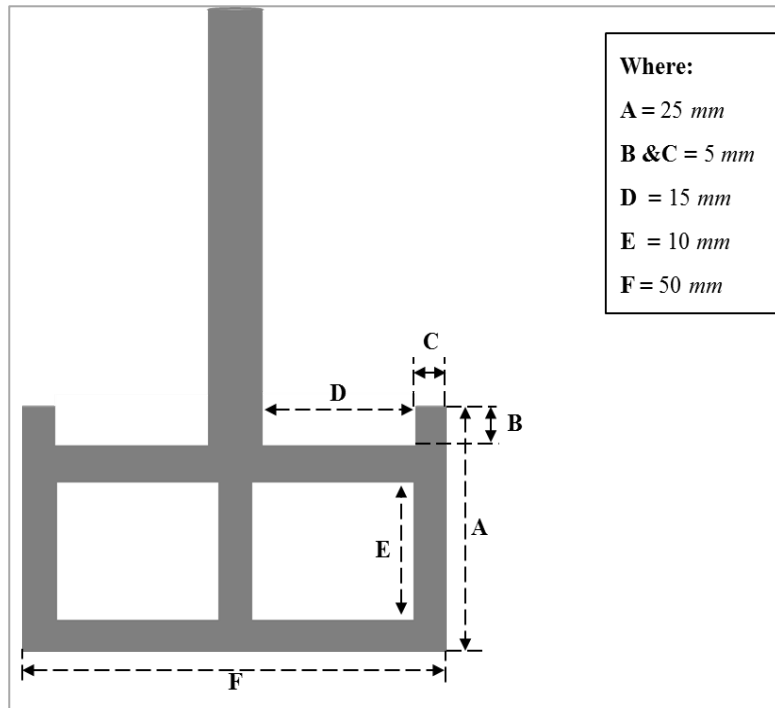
A Schematic showing the dimensions of the gate-impeller design spindle. (Dimensions included).
